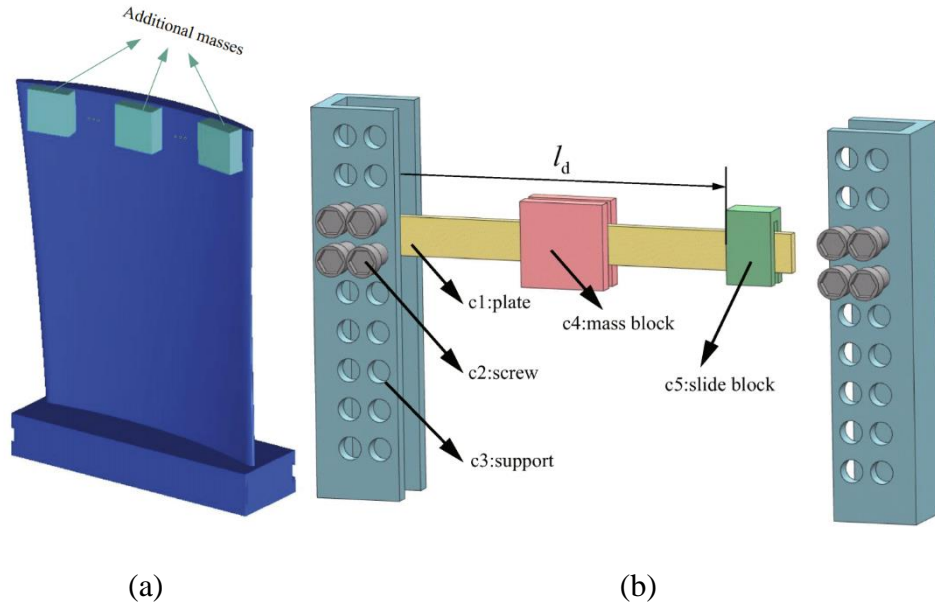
(a) Attached additional masses on workpiece [190]; (b) Structure of the passive damper [191].
